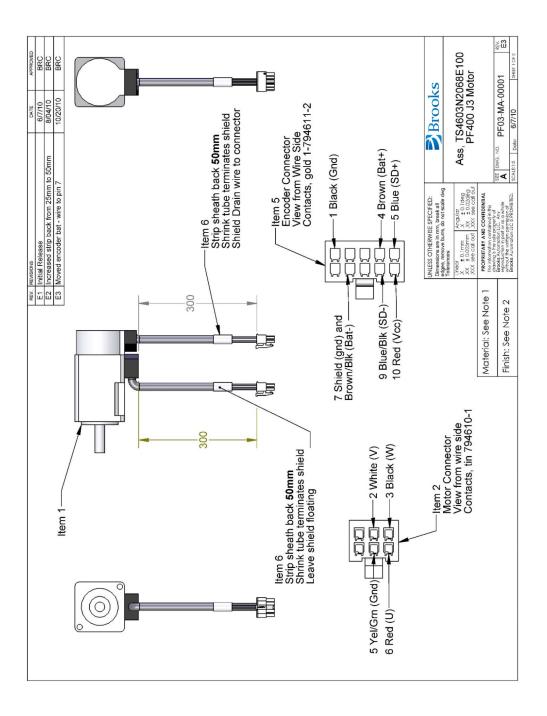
Assembly, TS4603N2068E100 PF400 J3 Motor
